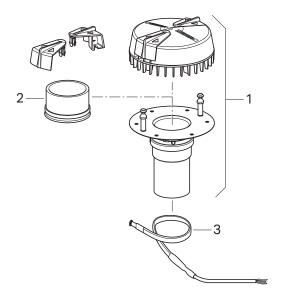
Components of the Geberit Pluvia roof outlet 19 I
